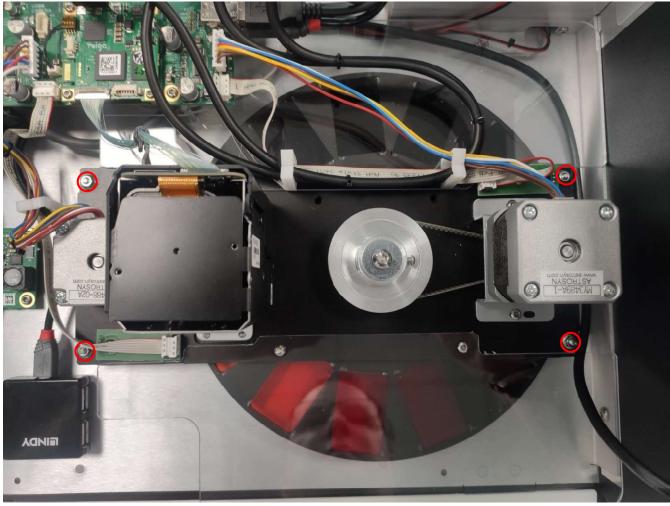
4x (5.5mm Driver) fixings that secure Camera/Filter to unit.
